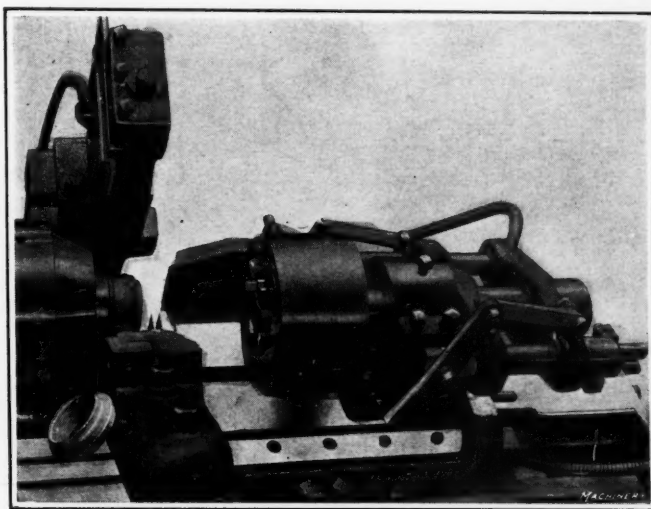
Automatic Die Fixture in Operation on Gridley Automatic Turret Lathe
